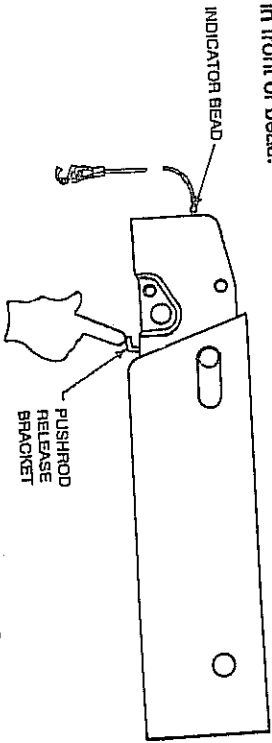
CHECKING AND RESETTING BREAKAWAY CABLE
